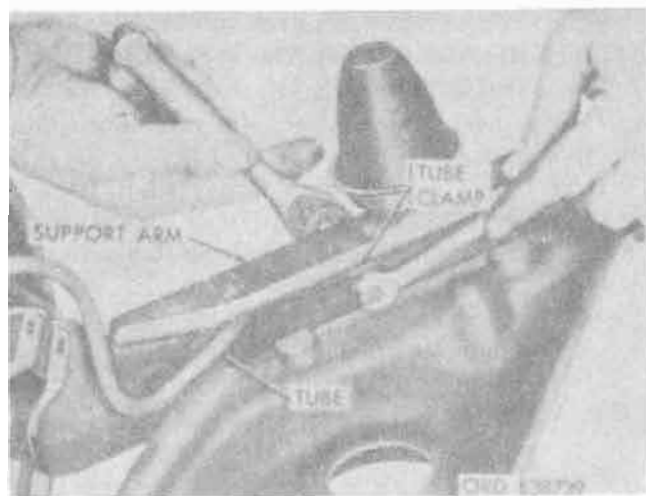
Rear brake tube and clamp (M151, M151A1, M151A1C and M718 vehicles).
